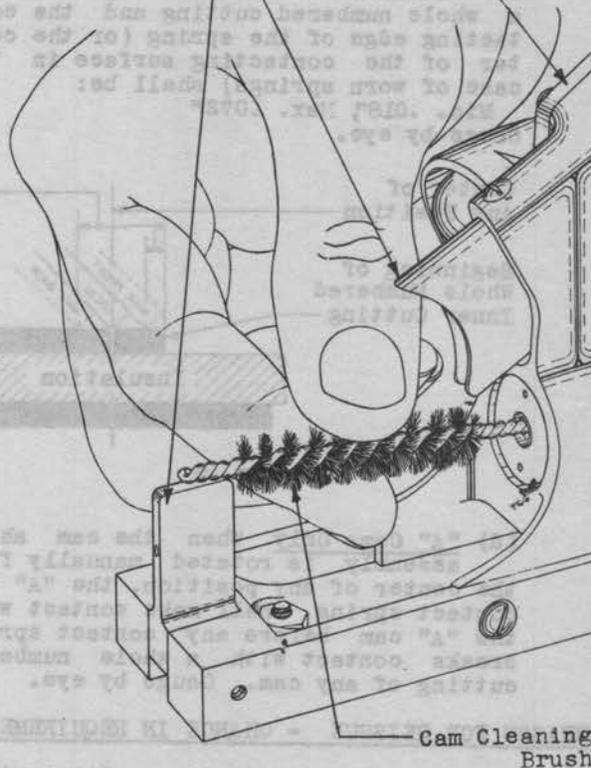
Method of Mounting Cam Cleaning Brush in the No. 435A Vacuum Head
